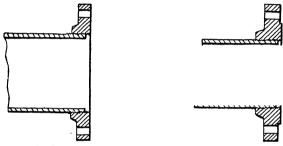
Standard cast-iron screwed Fig. 362.—Extra-heavy cast-iron companion flange.
